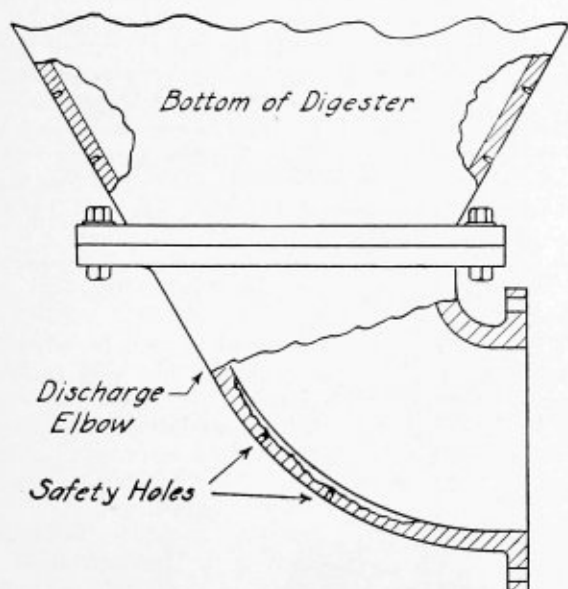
Elbow at bottom of digester, where metal is eroded
